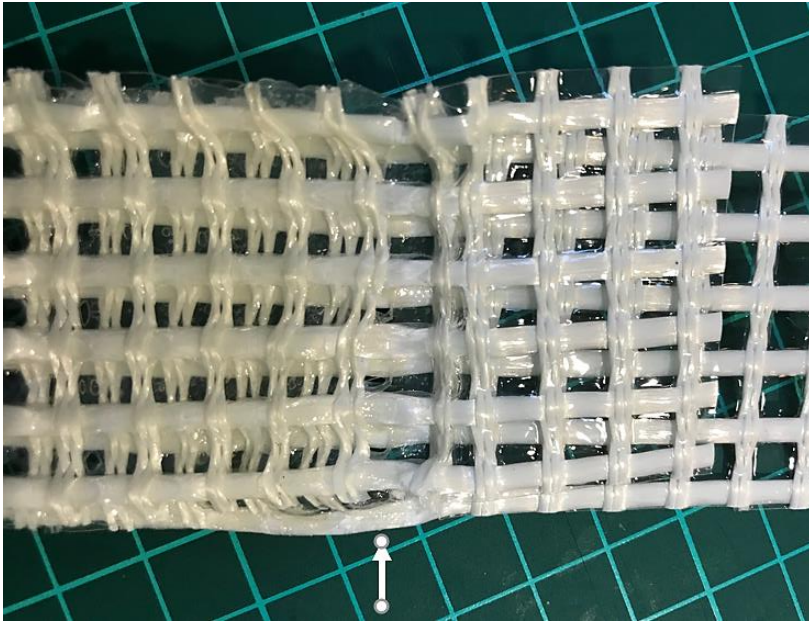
Welded Fluoscrim™ pieces tested under EN ISO 1421 protocol. The bottom sample shows a failure due to the use of an inappropriate clamp system.
